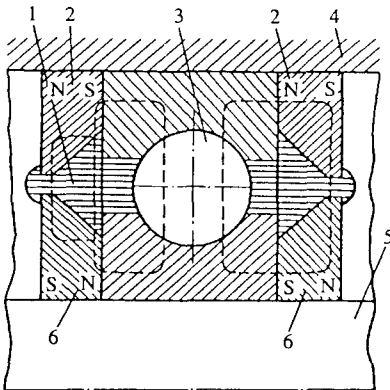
Schematic diagram of the rolling bearing lubricated by a magnetic fluid. 1-magnetofluid; 2,6-magnets; 3-ball; 4,5-movable and immovable pieces.
